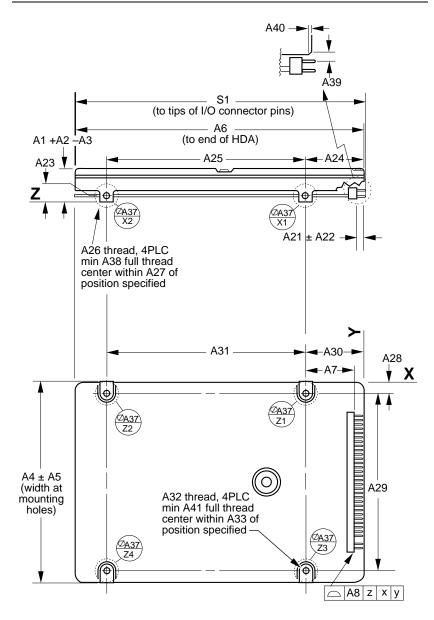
Drive mounting dimensions—side and bottom view (for dimension specifications, see table on pages 21 and 22).
